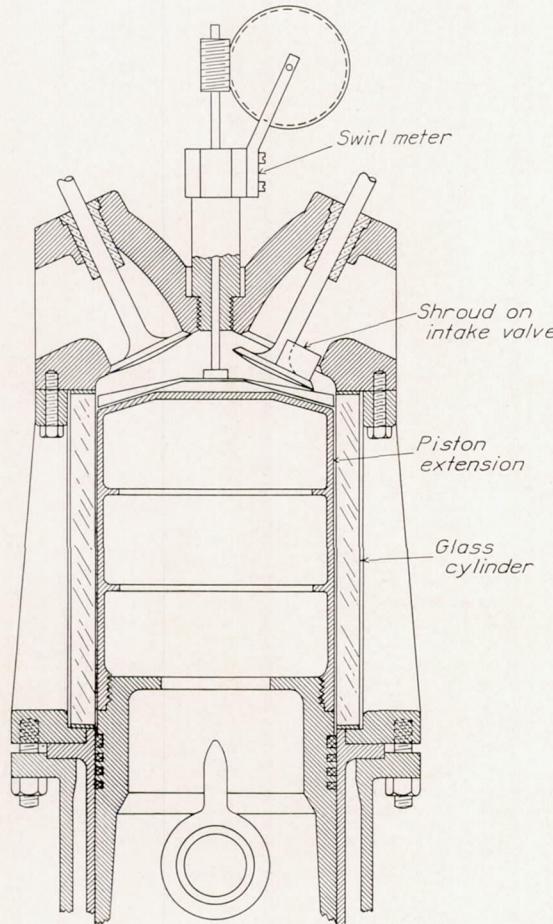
Sketch showing glass cylinder and cylinder head.
